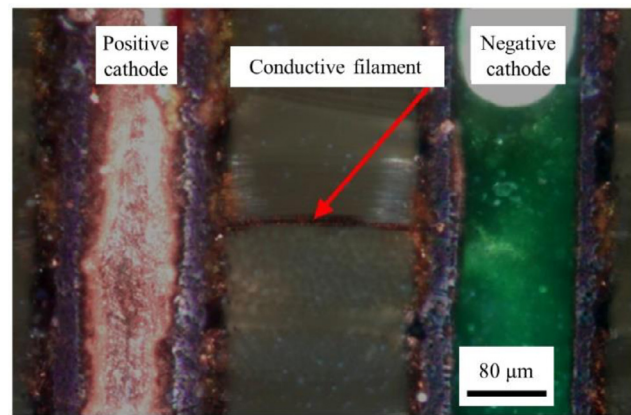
Formation of a conductive anodic filament between plated-through holes in a PCB [63].
